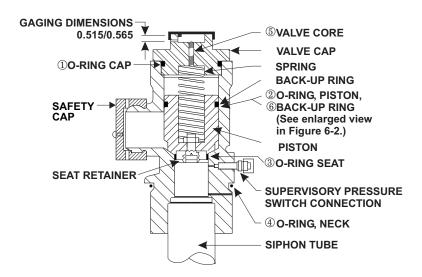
Valve Assembly (1½ in., 2 in. and 2½ in.)
